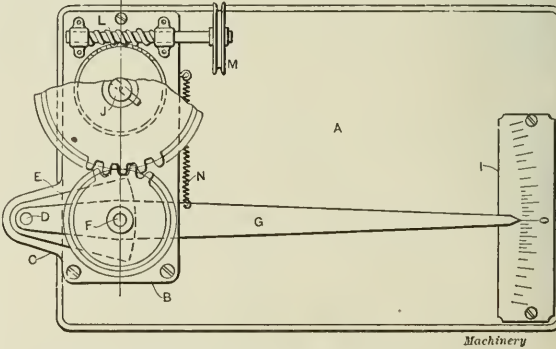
Fixture for testing Truth of Cut Gears by revolving with a Master Gear and noting Change in Center to Center Distances
